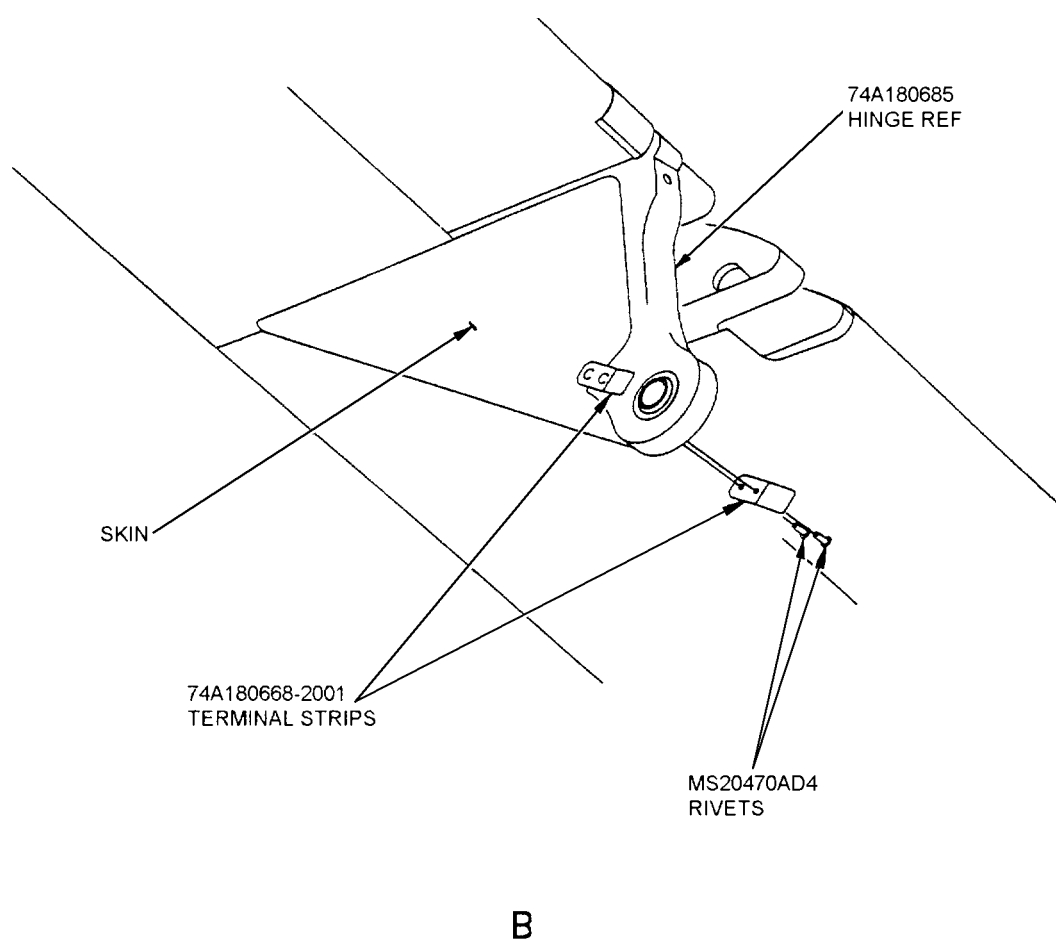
Electrical Bonding Spring Replacement (Sheet 2)
